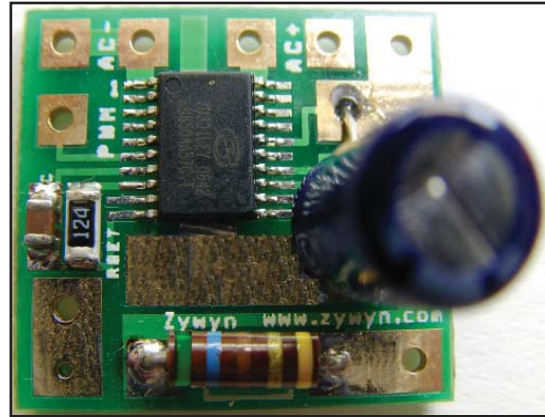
ZD832EVB Evaluation Board Component Side Topview
